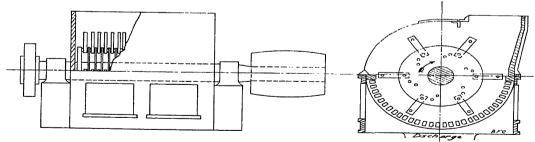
The Jeffrey crusher, illustrating the rotary hammer mill type of disintegrating device.
